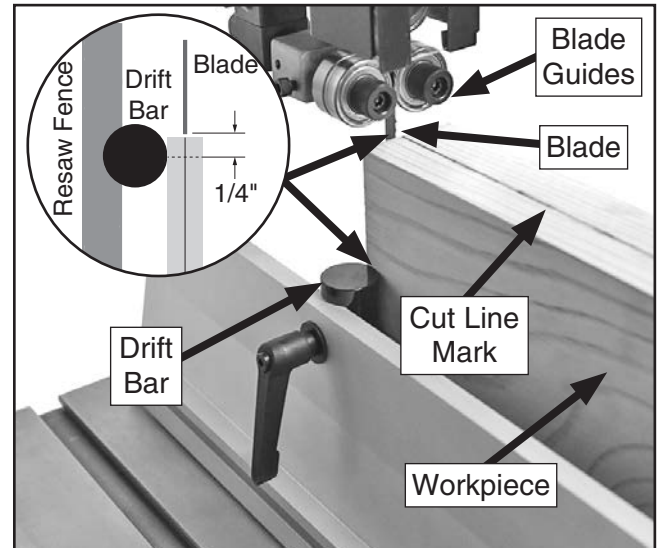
Workpiece positioned to cut using resaw fence with drift bar.
